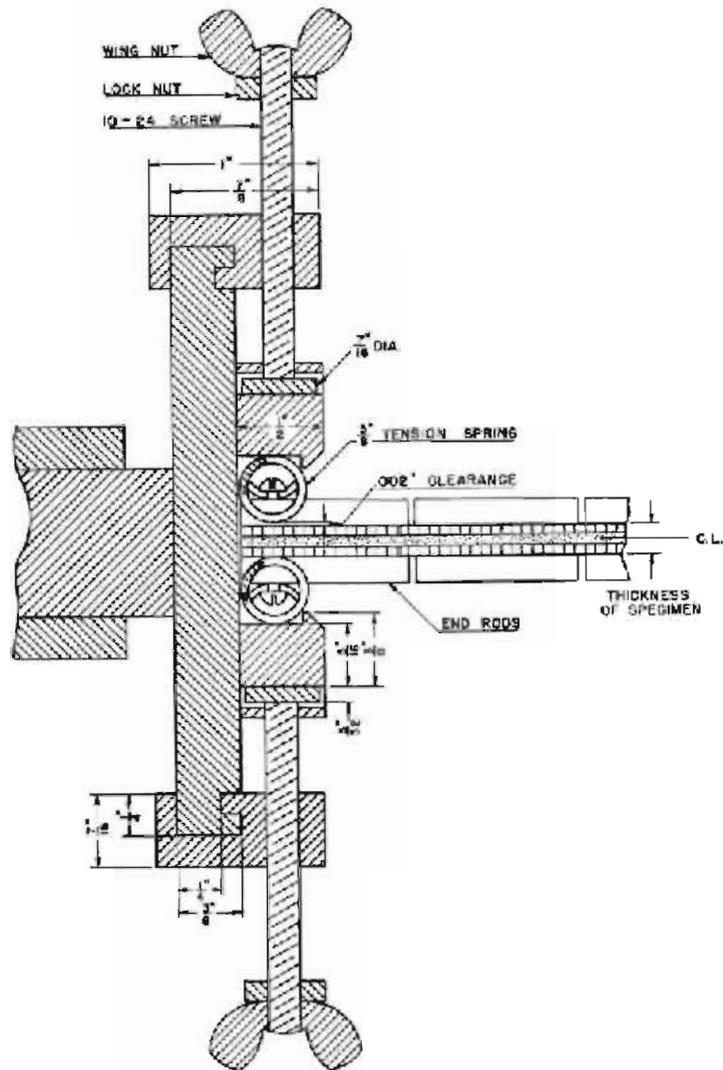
Detail of edge support for panel buckling test of stiffened flat plywood plates.
